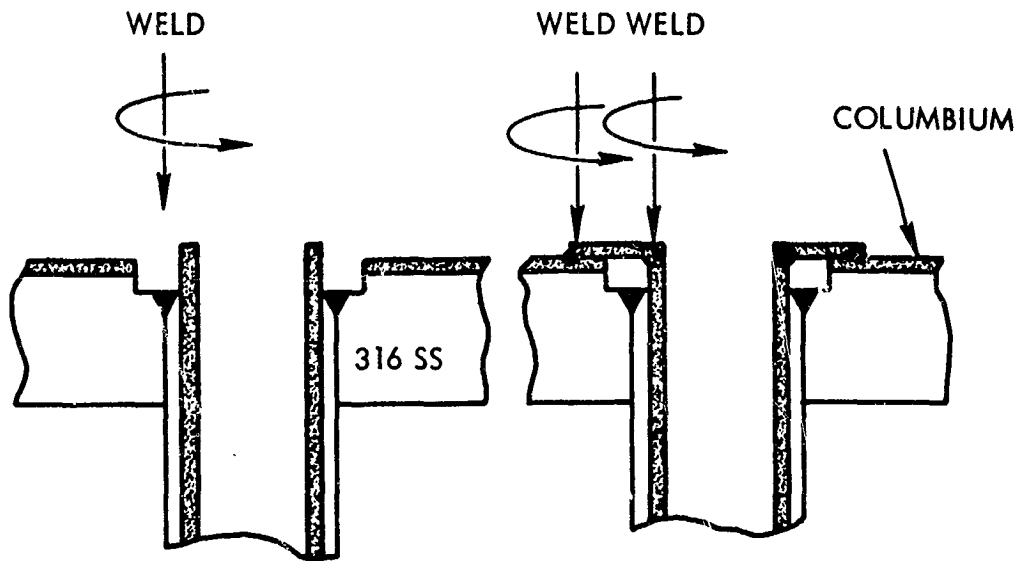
Possible Joining Technique for Bimetal Tube to Header Assemblies
